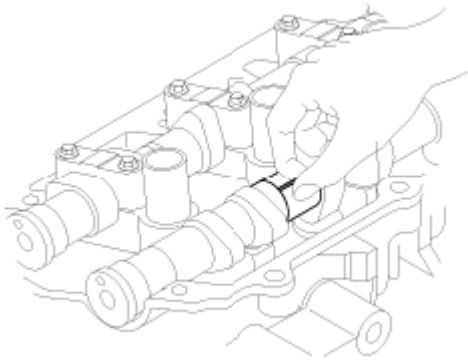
Inspecting Camshaft Journal Clearance
